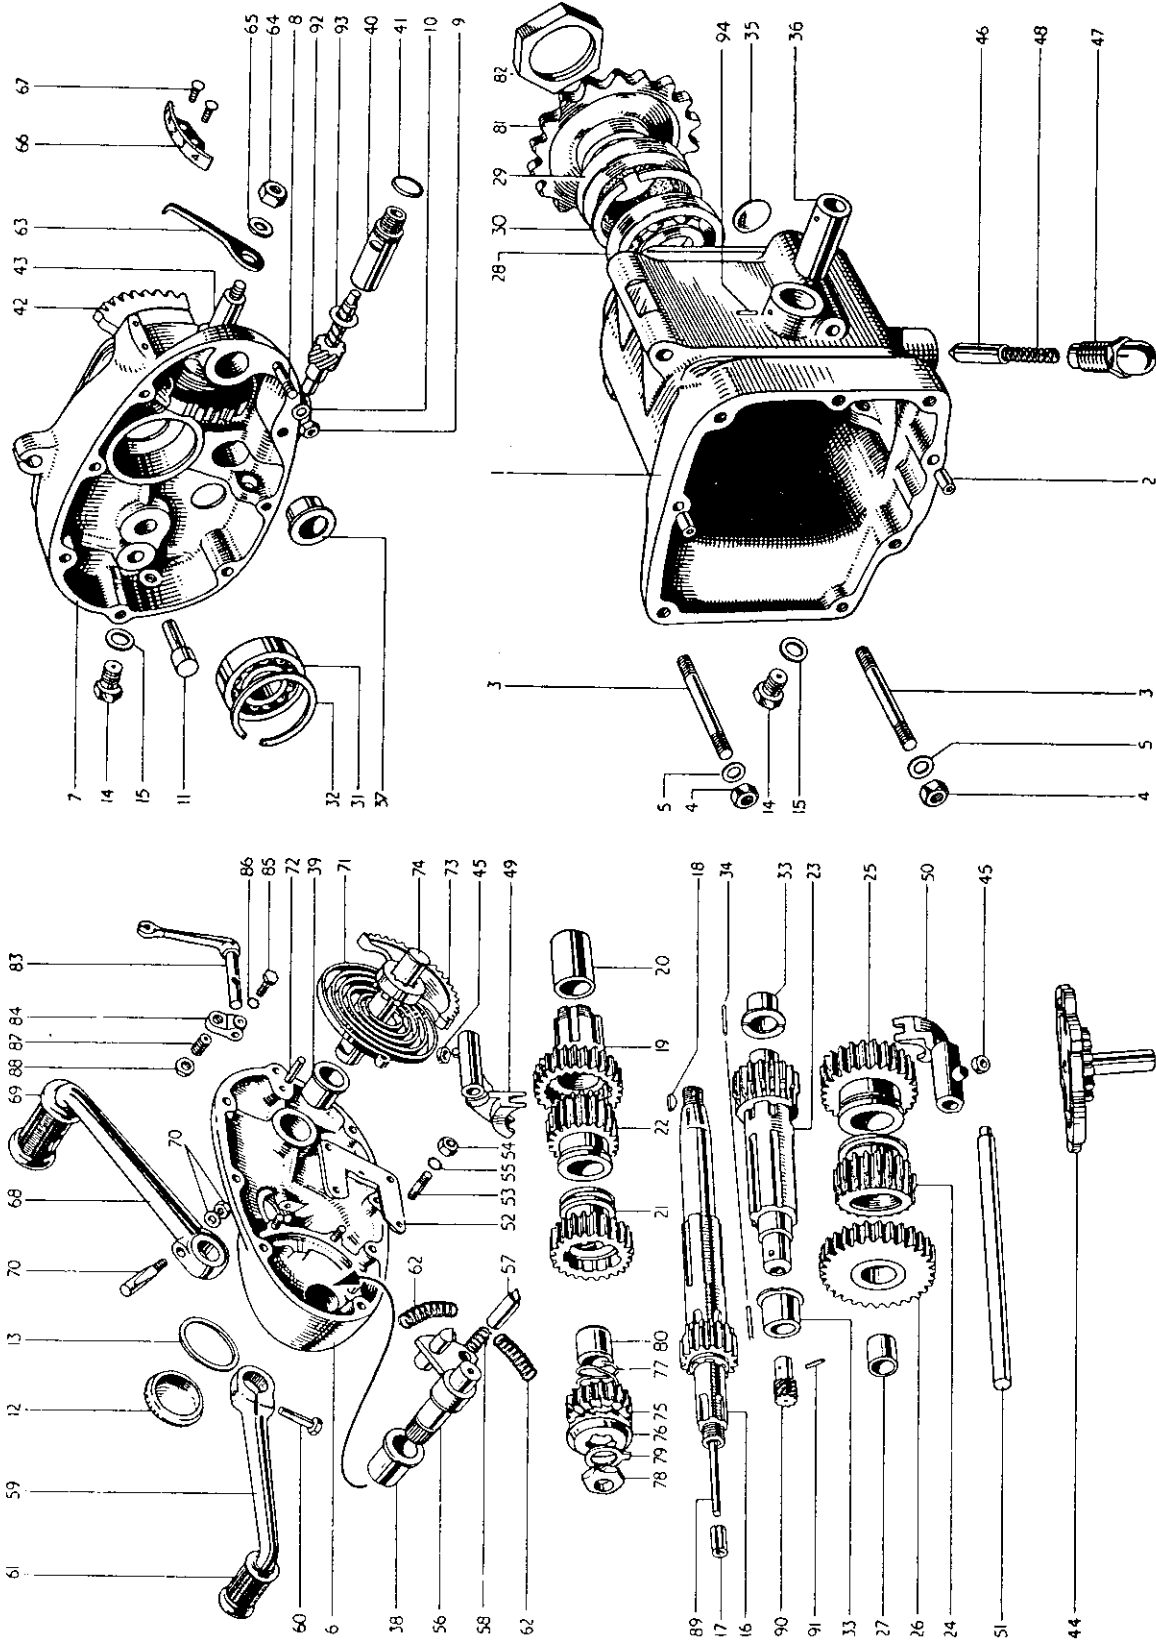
GEARBOX SHAFTS, GEARS AND CASING.
